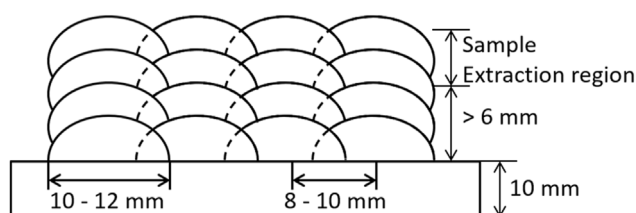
Schematic of the cross-section of the weld deposit.
